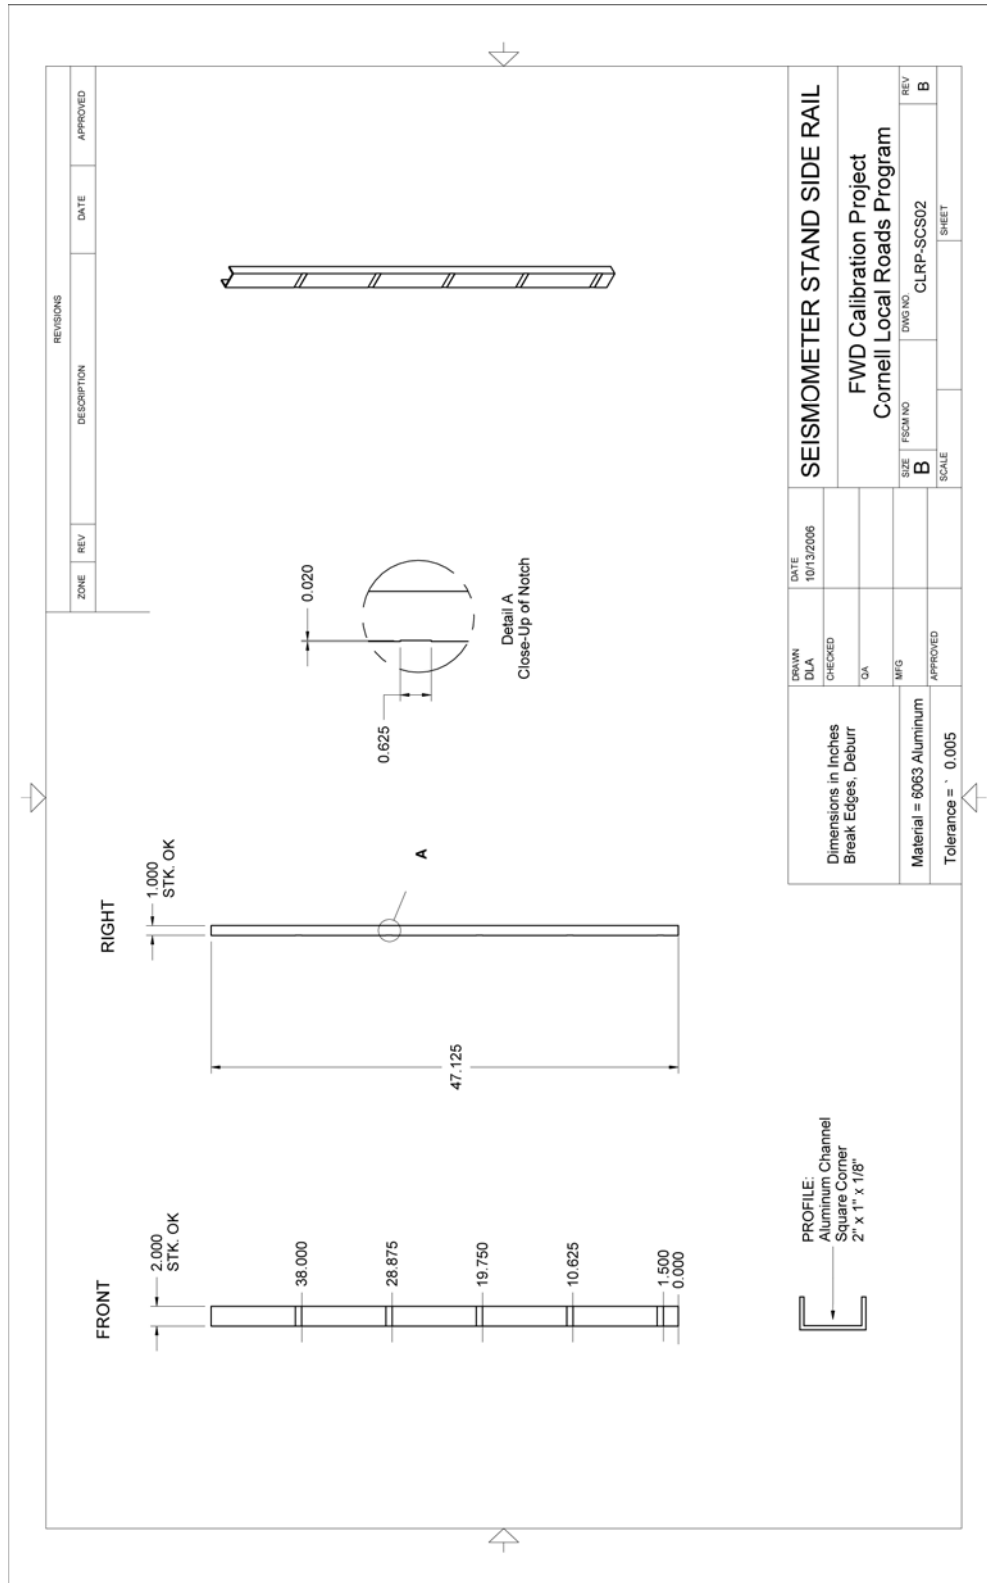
Drawing. CLRP-SCS02 Seismometer Stand Side Rail.
